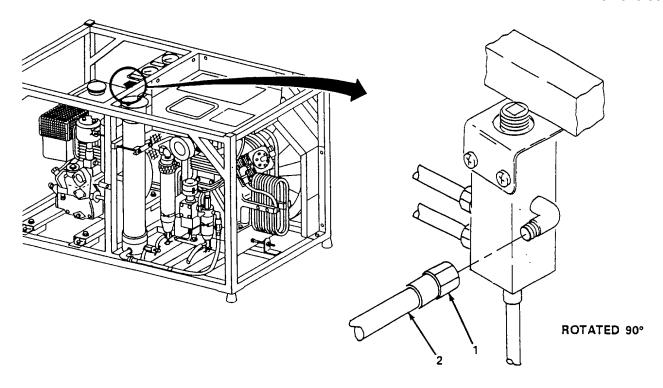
Air Tank Charging Whip Assembly, Replace.
